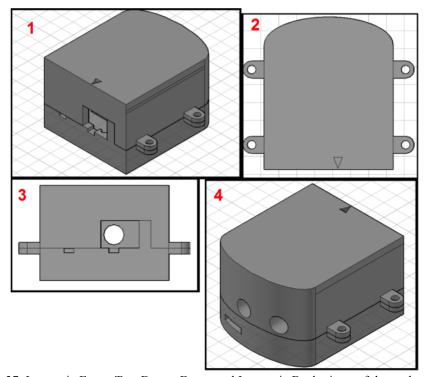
Isometric Front, Top-Down, Front, and Isometric Back views of the probe casing.
